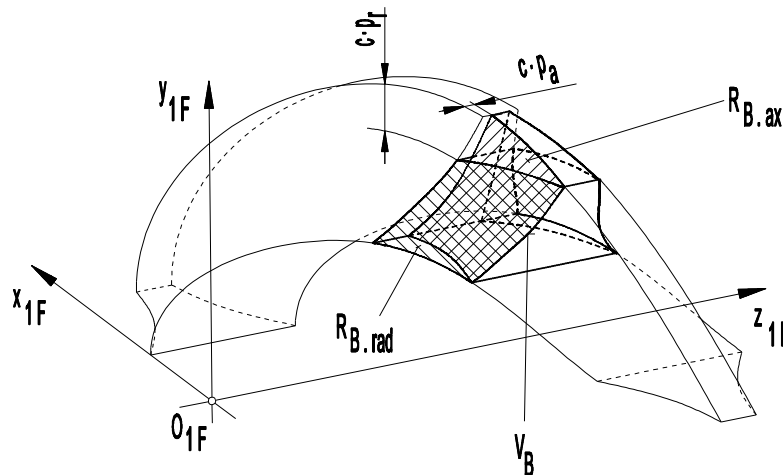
The cutting edge of the tooth surfaces of the hob in the rotation coordinate system [5]
